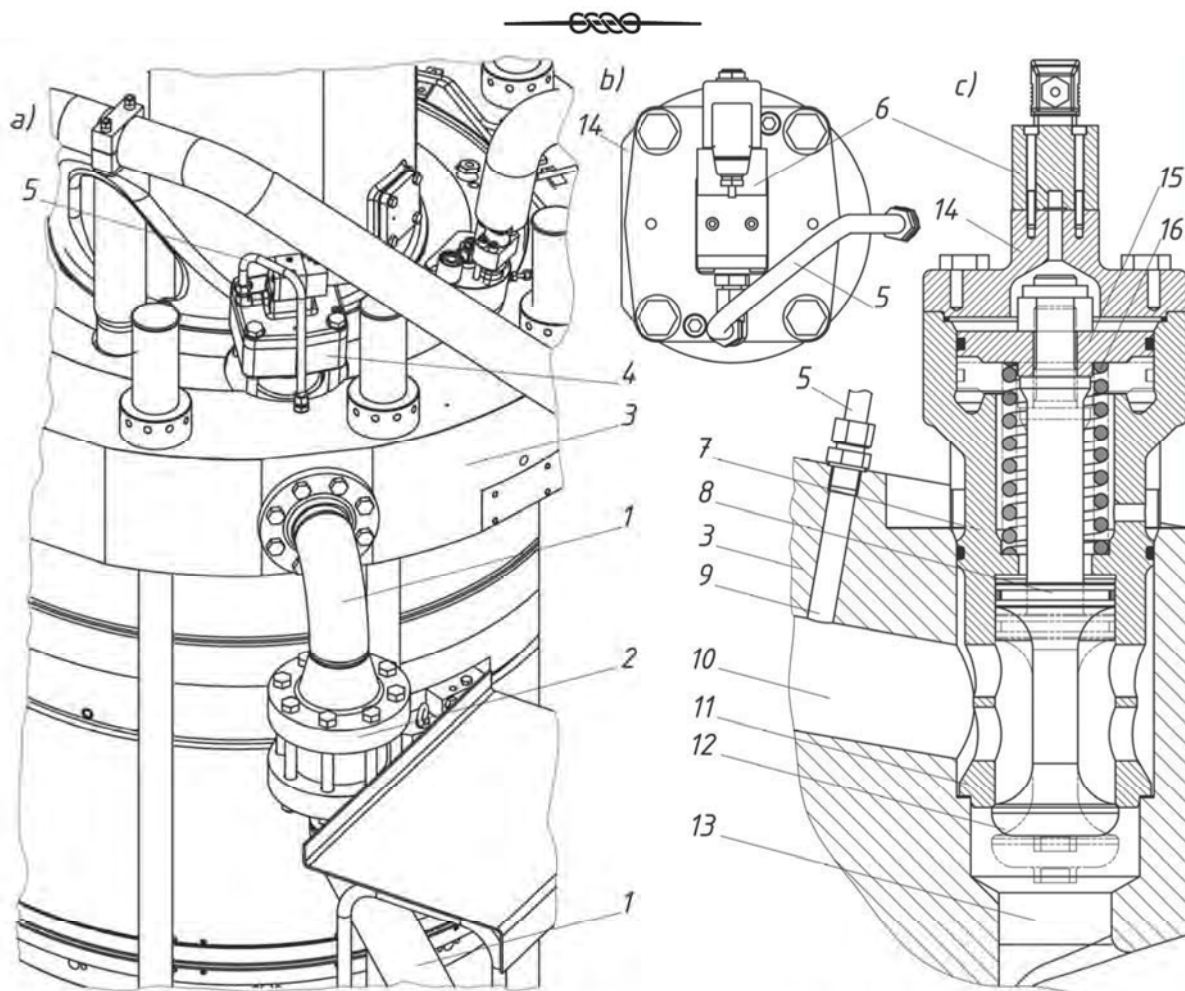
Location of the starting valve (a), control valve (b) and starting valve (c) of low-speed engines of the WX series from WinGD: 1 – air supply line to the starting valve; 2 – flame arrester; 3 – cylinder cover; 4 – start valve; 5 – air supply tube to the control valve; 6 – solenoid valve for controlling the air supply to the cylinder; 7 – starting valve housing; 8 – spindle balancing piston; 9 – air supply channel to the control valve; 10 – air supply channel to the starting valve; 11 – starting valve seat; 12 – starting valve plate; 13 – air supply channel to the working cylinder; 14 – cover; 15 – pneumatic piston for starting valve drive; 16 – return spring (adapted from [14])
